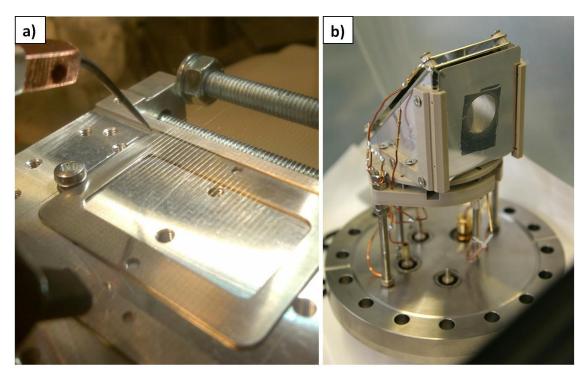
a) Point welding jig used in the fabrication of a grid. Wire (here $20 \mu m$) is first wound around the jig where the pitch is determined by the pitch of the threads in both ends. Then, each wire is point welded from both ends to the frame holding the final grid structure. b) T2 timing detector fully assembled with $10 \mu g/cm^2$ carbon foil.
